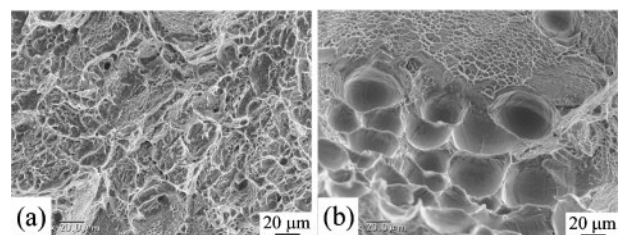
Fractography of tensile specimen of welded joint of 12 mm thick Ti-6Al-4V titanium alloy by hybrid welding at 10 kW, 150 A, 2 m/min and  $f_d = -12$  mm: (a) ductile and (b) porosity.
